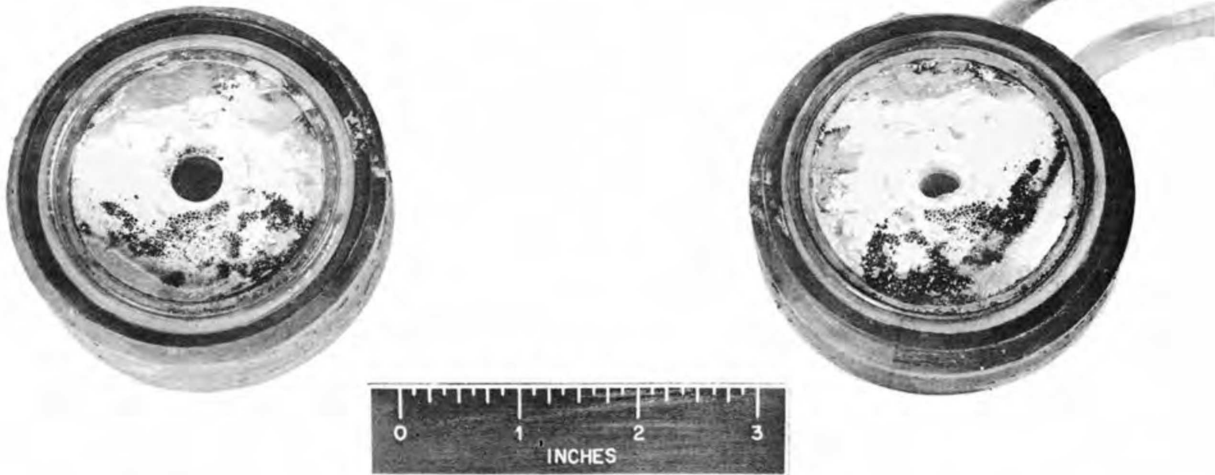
Indented-Seal-Flange Joint After Removal from Molten Sodium Test Loop.
